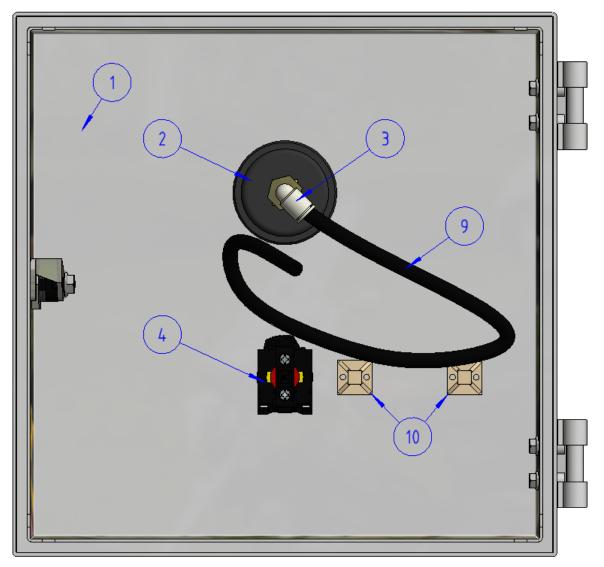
Pneumatic Control Panel Door Inner Components Layout
